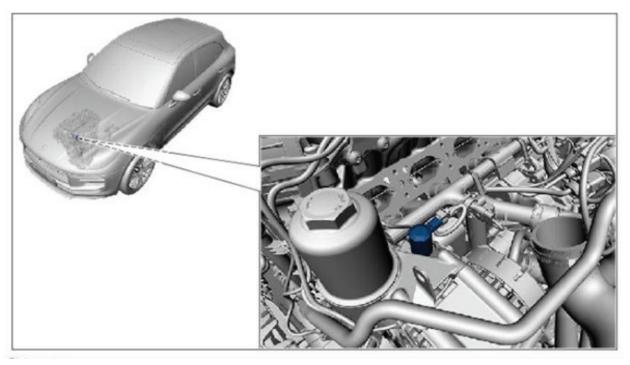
Installation position of control valve 9A7.115.243.A on R4 Evo with intake manifold removed from WM 172519.
